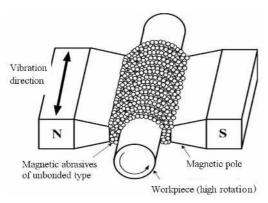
Machining principle of the micro-magnetic abrasive finishing process.
